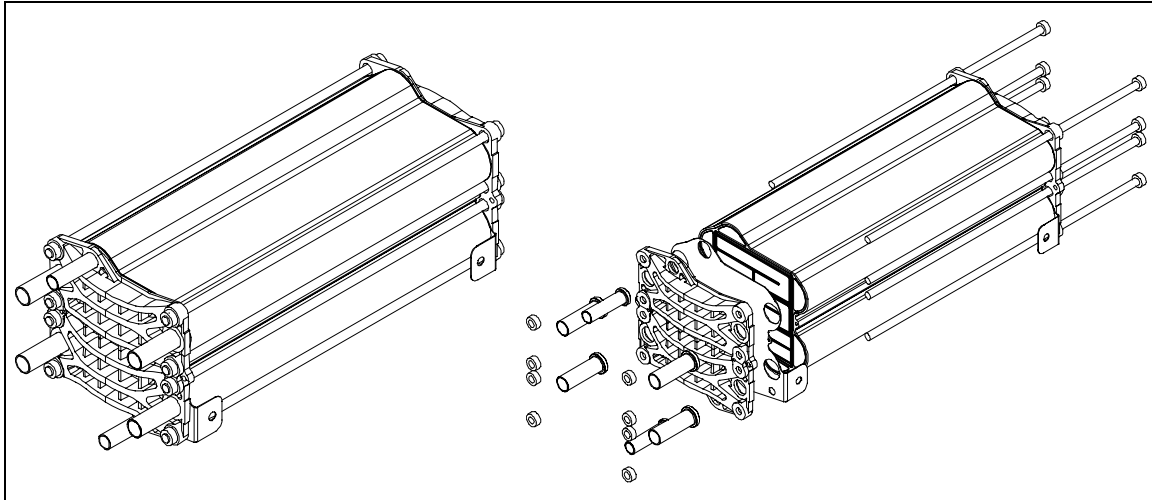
Stack of the Hy.Power-Project (bomb shaped end plate)
